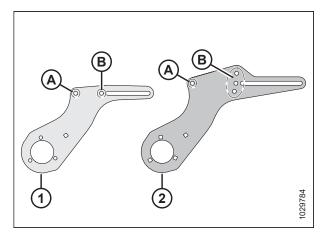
Initial Position of Adjustable Mounts – Three-Piece Auger
